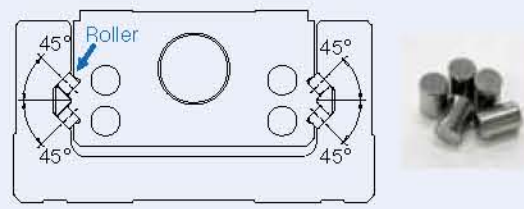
Cross-sectional shape of the linear guide element of a TOUGHCARRIER
